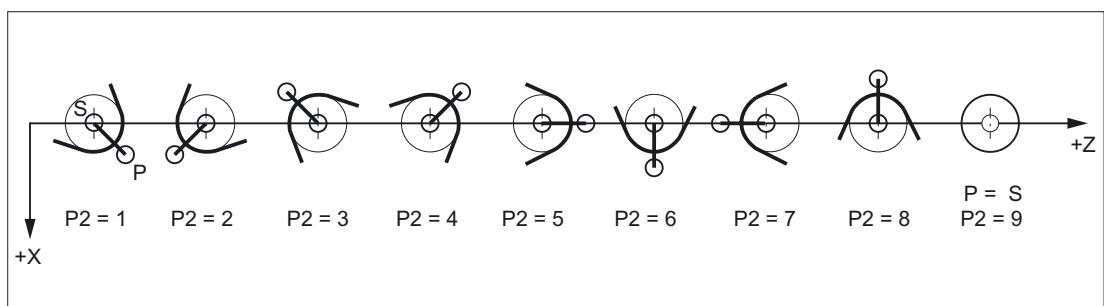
Tool parameter 2 (P2): Machining in front of the turning center
